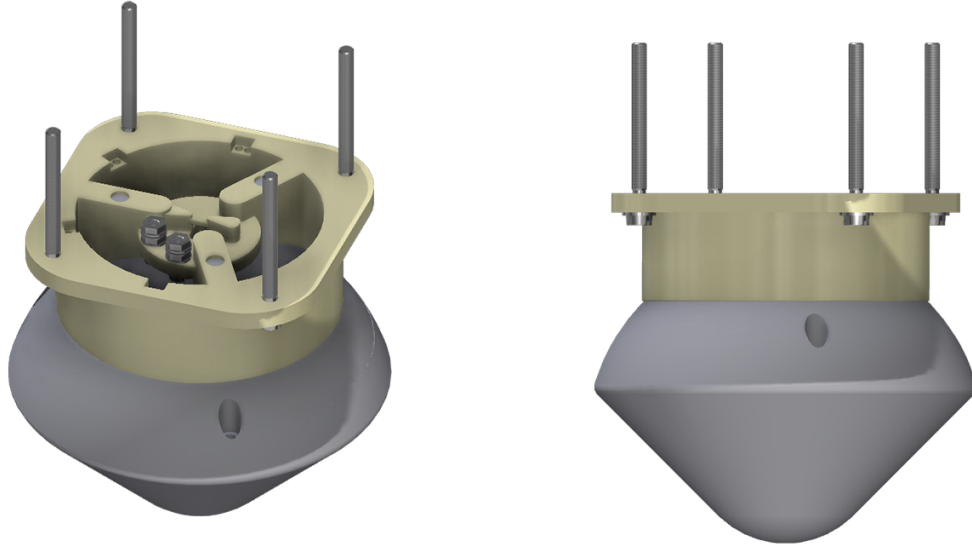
Full assembly showing the release platform with fastening bolts, pins and the MIRKA2 capsule.
